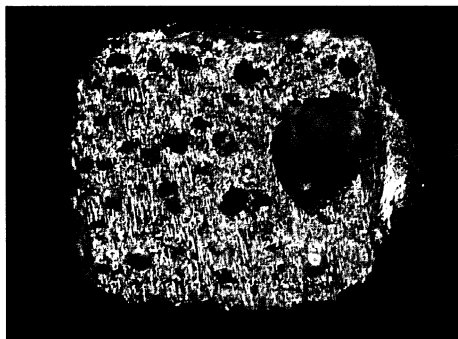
(a) Shear surface of pin 2 on PCB side (unit 1-A-2)
